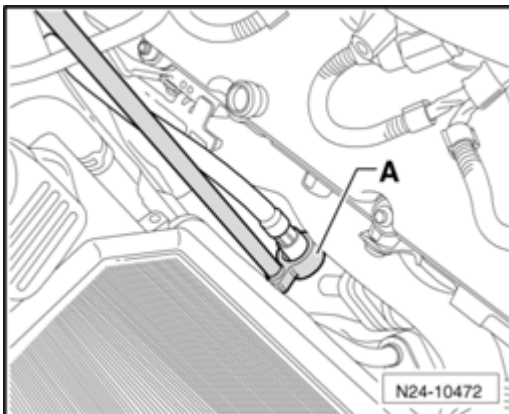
Removing Oxygen Sensor Using An Open End Wrench
